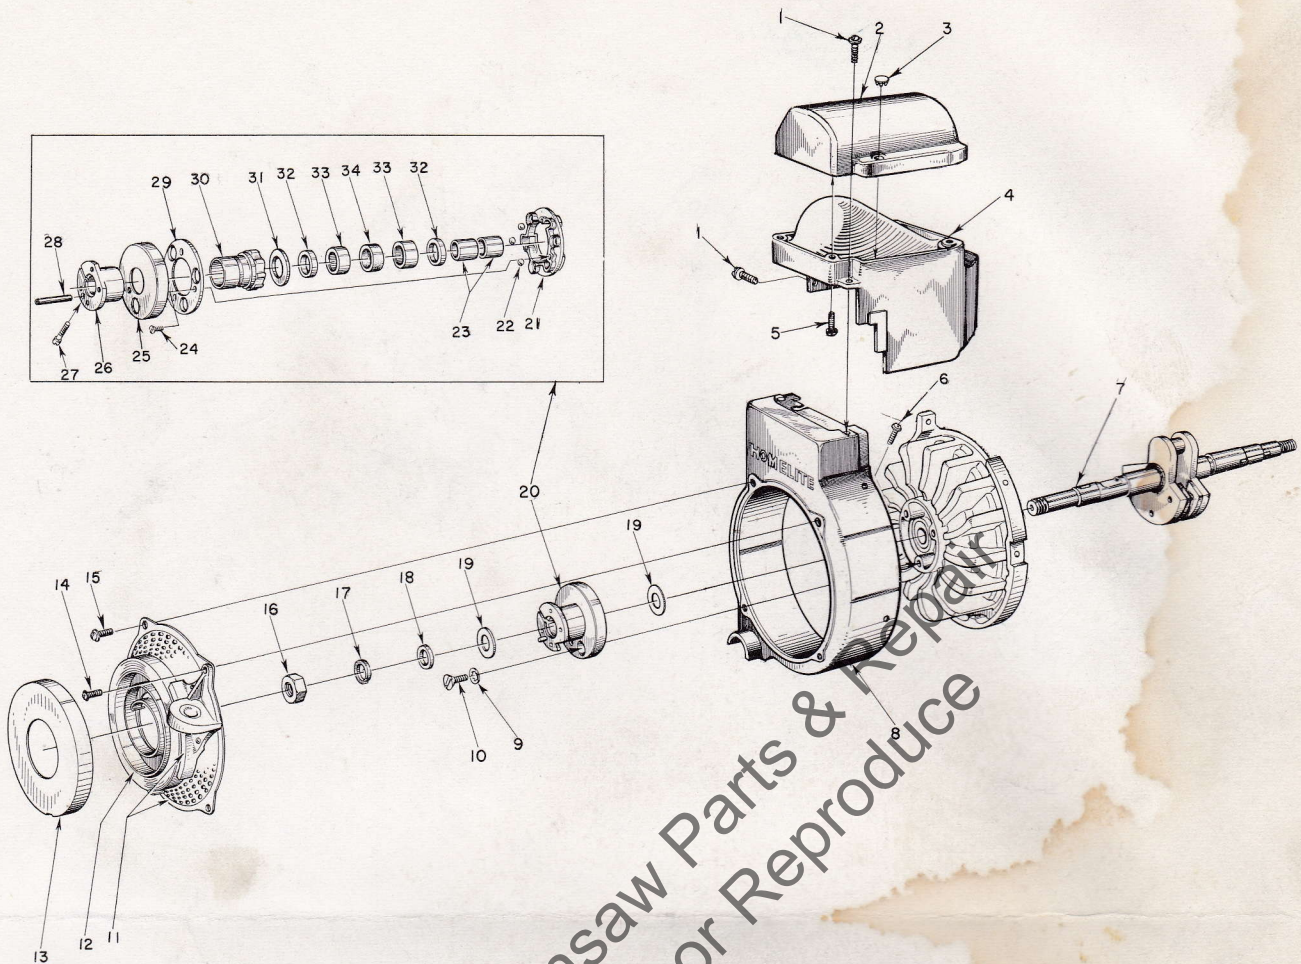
BALL DRIVE AND AIR SHROUD
